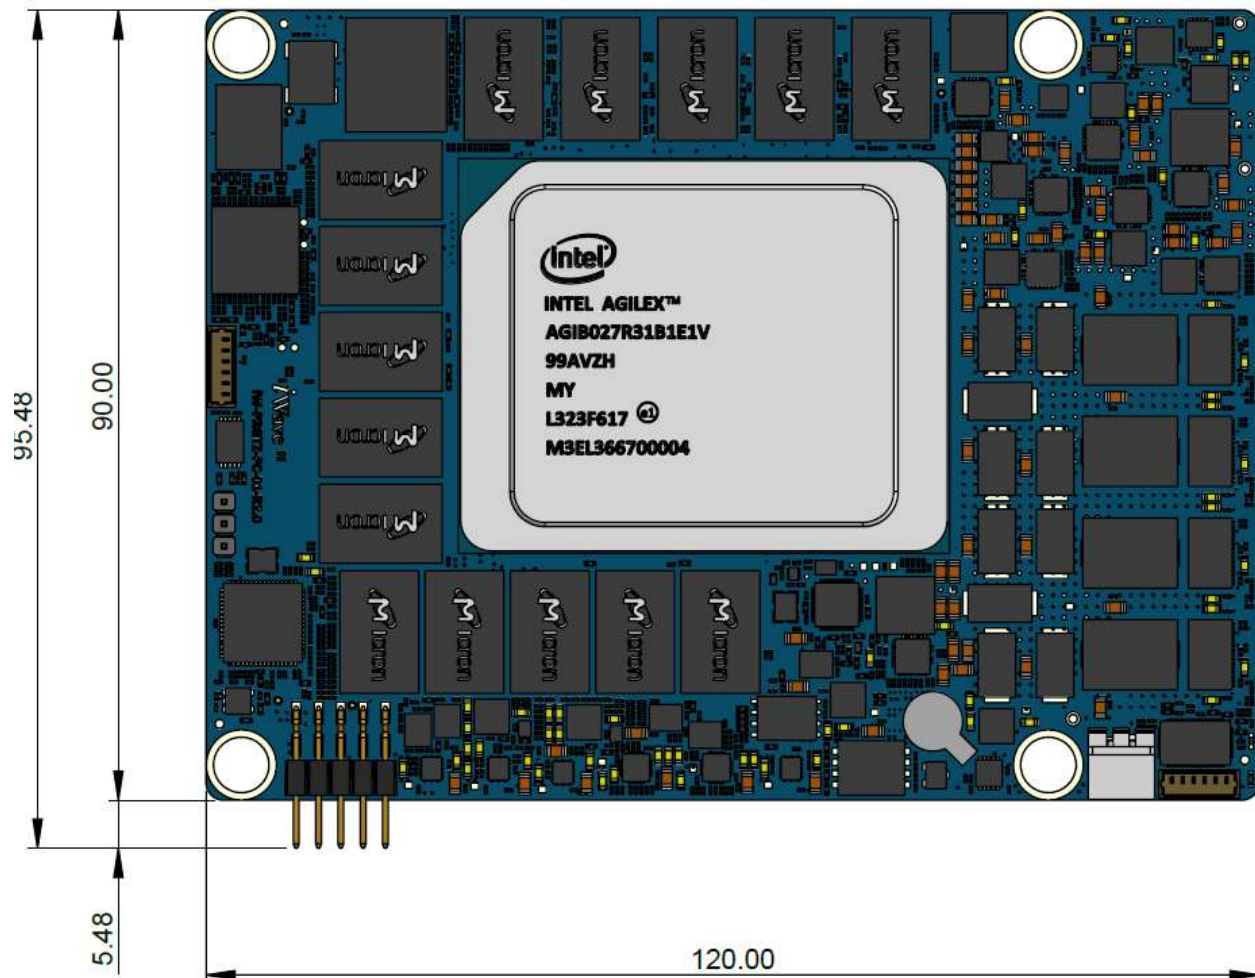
Mechanical dimension of Intel Agilex 7 SoC and FPGA SOM - Top View
